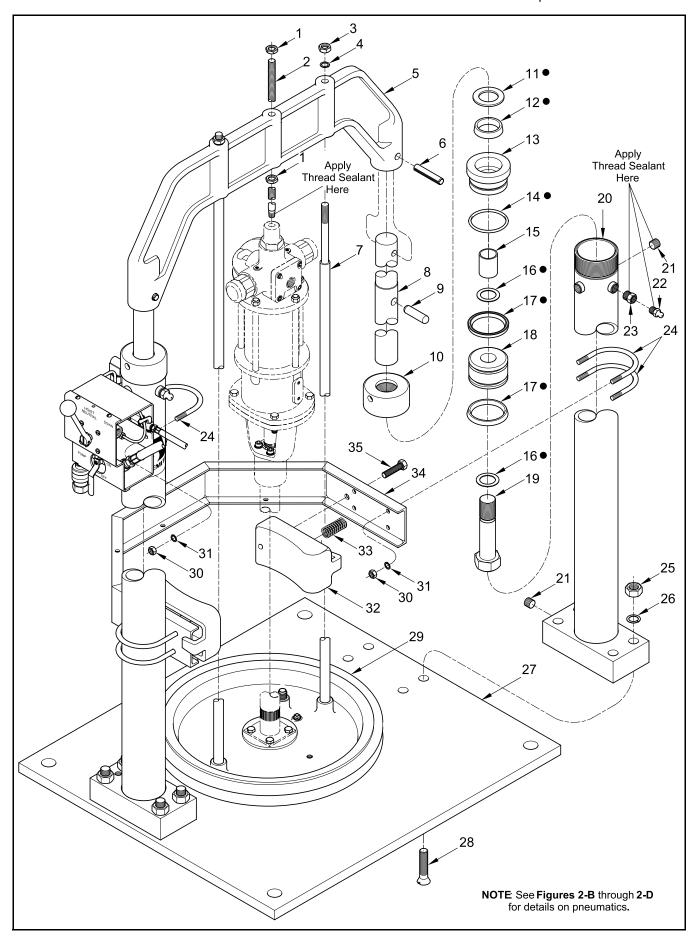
A Pump Hoist Model 7818-F5 - Exploded View
